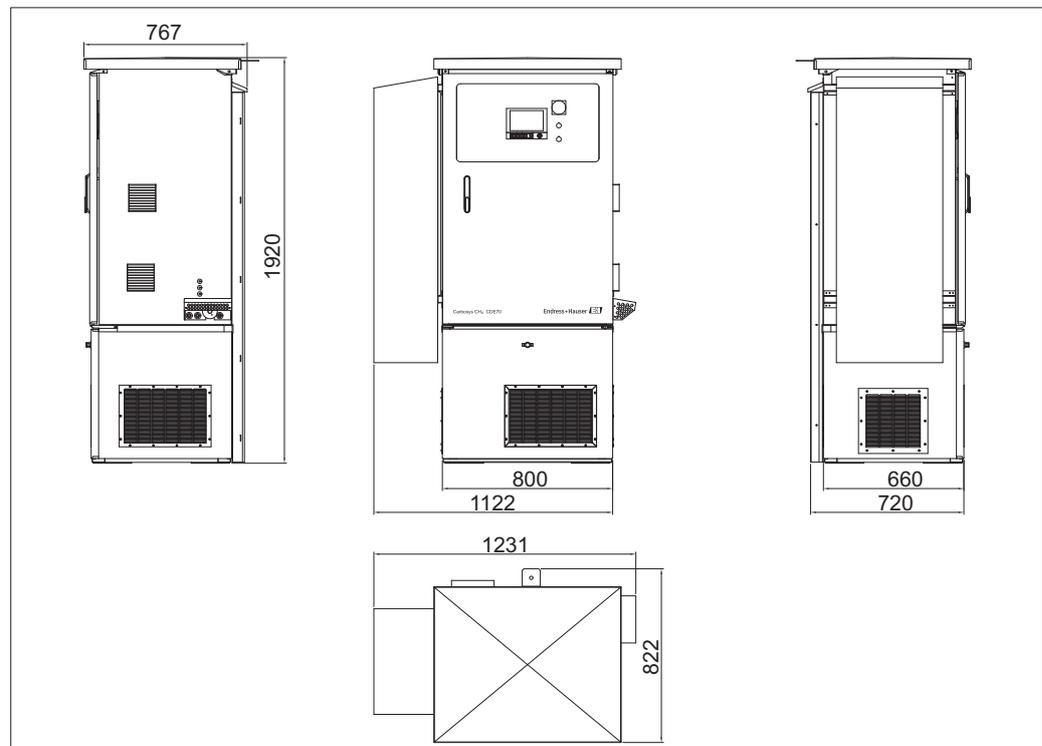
Dimensions of the Carbosys CH₄ CDE70 measurement station including optional gas bottle housing amendment
